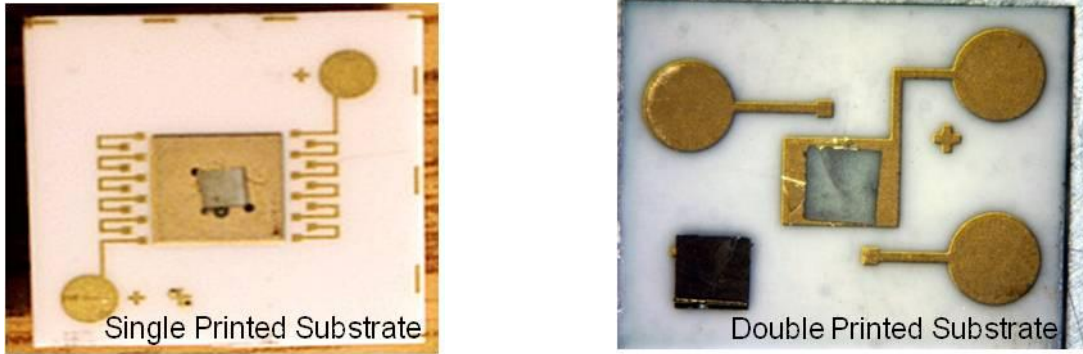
Fracture Surface of Single Printed Sample (left) and Double Printed Substrate (right) after 2000 hours storage at 500°C
